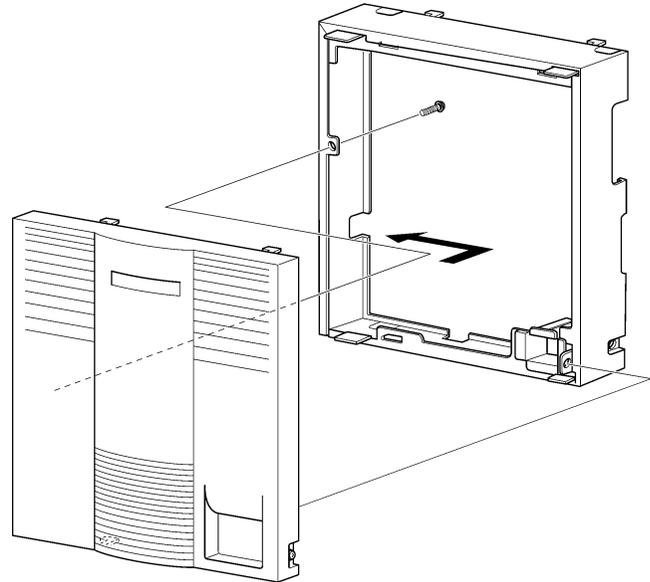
Attaching the Front Cover and Front Cover Extender
